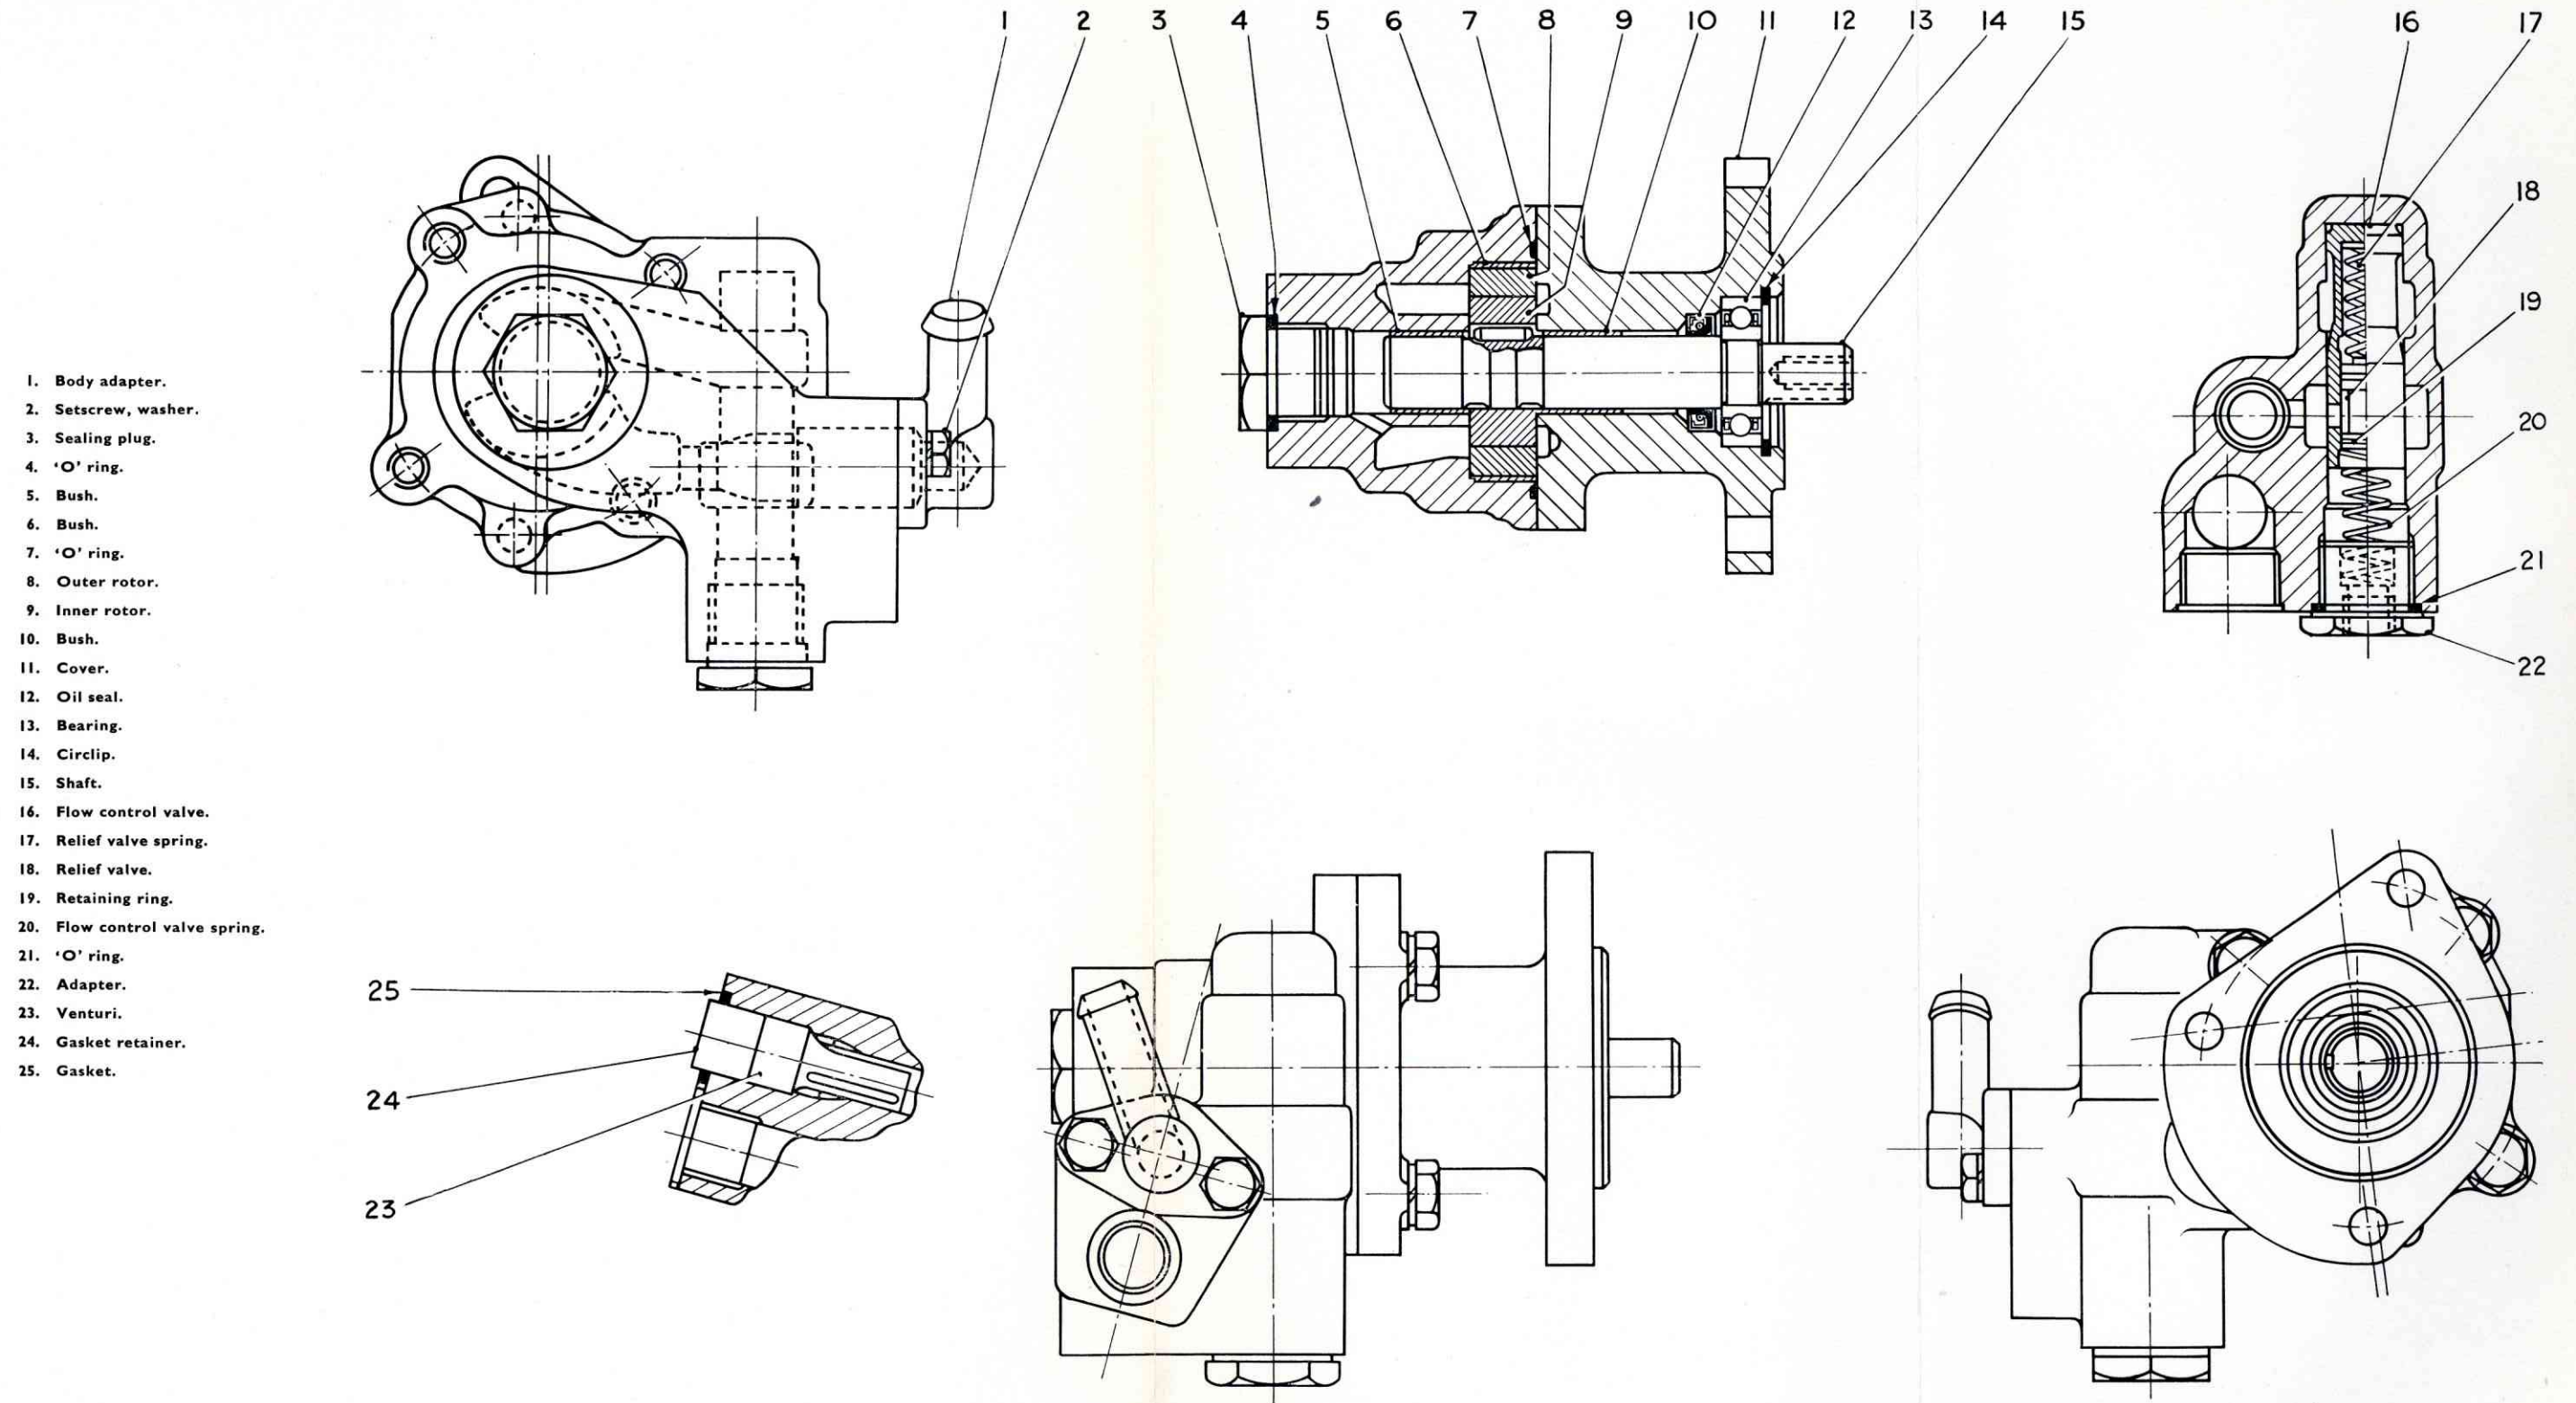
SECTIONS THROUGH THE HOBOURN-EATON PUMP
